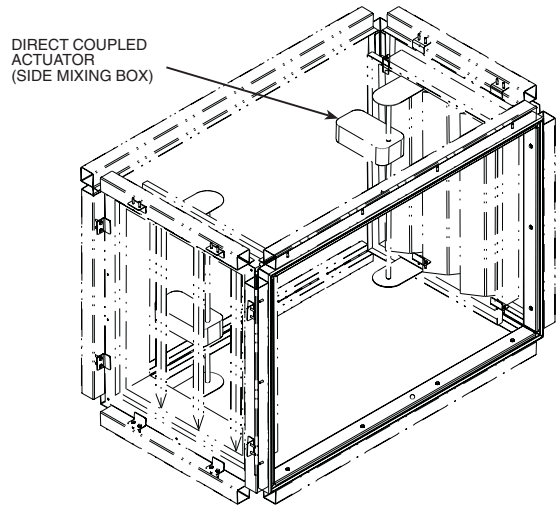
Mixing Box/Filter Mixing Box, Typical Damper Arrangements (Size 14 Shown)
